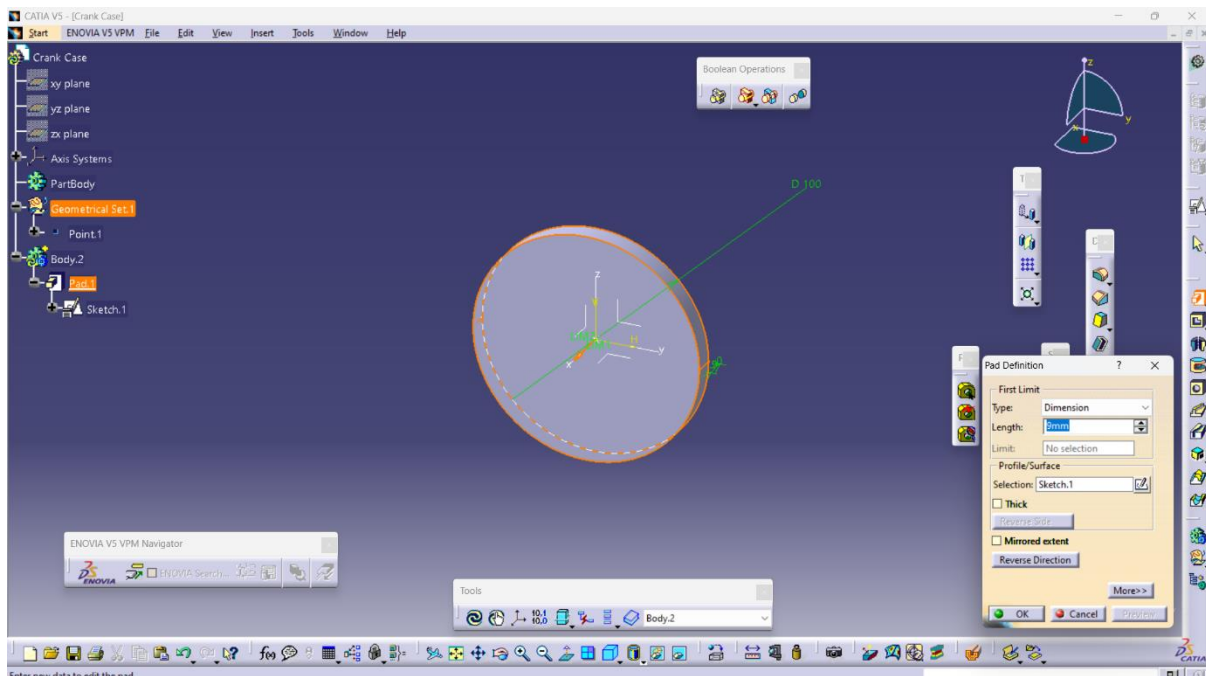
Creating a 3D body using "Pad" command in Part Design module
